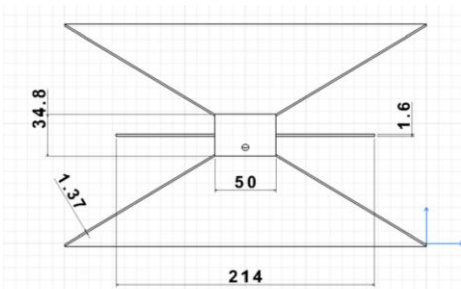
Technical drawing of TEM Cell – back view (probe side)
